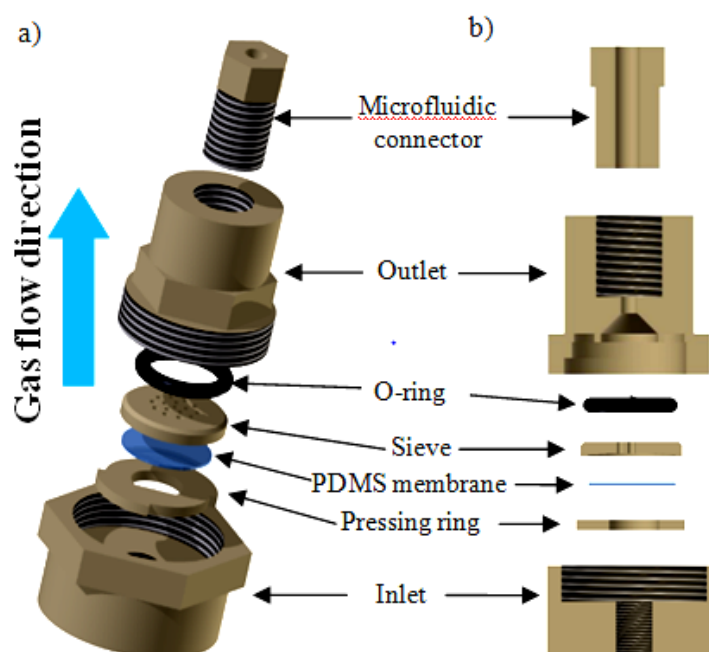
3D printed membrane-based gas microflow regulator: a) exploded schematic view, b) cross-section view
